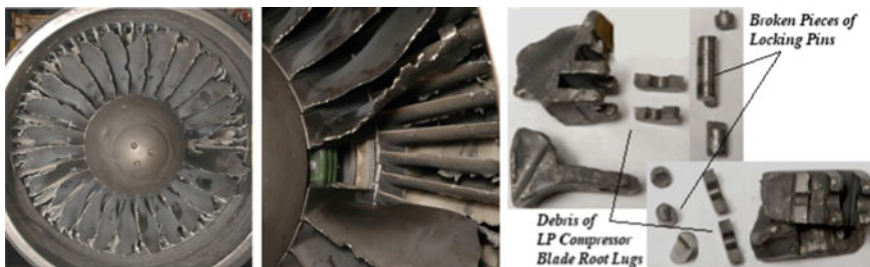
Front portion of the aero-engine during receipt inspection, and the debris collected
